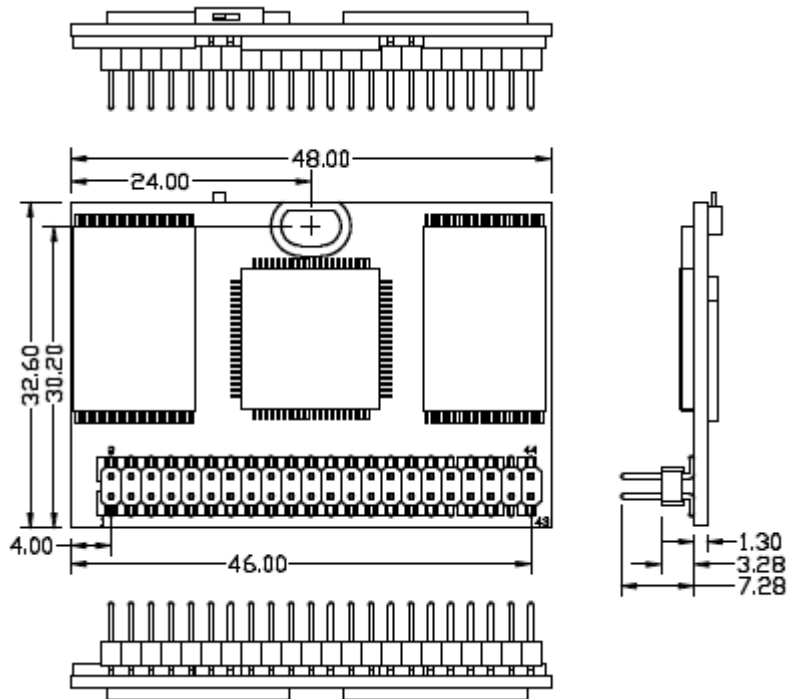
Mechanical Dimension of EDC1SE 44-pin (Horizontal Female Type B)
